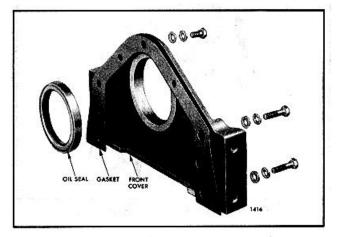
Crankshaft Front Cover Details and Relative Location of Parts
